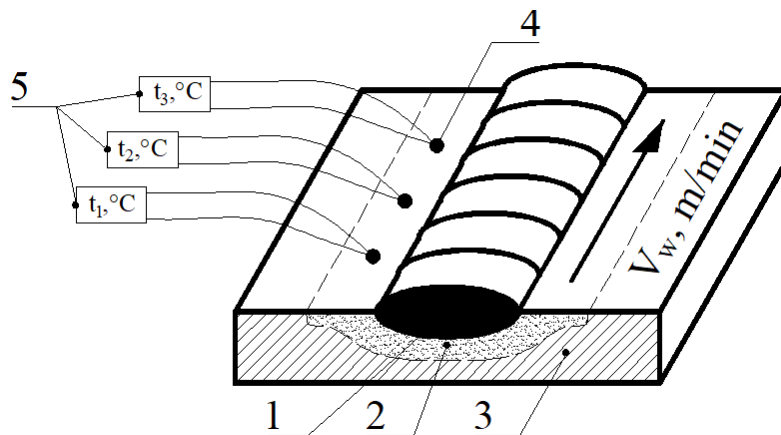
Schematic diagram of the location of the thermocouples in the specimen: 1- Weld metal; 2- Heat Affected Zone; 3- Base metal; 4- Thermocouple with thermal protection; 5- Thermometer
